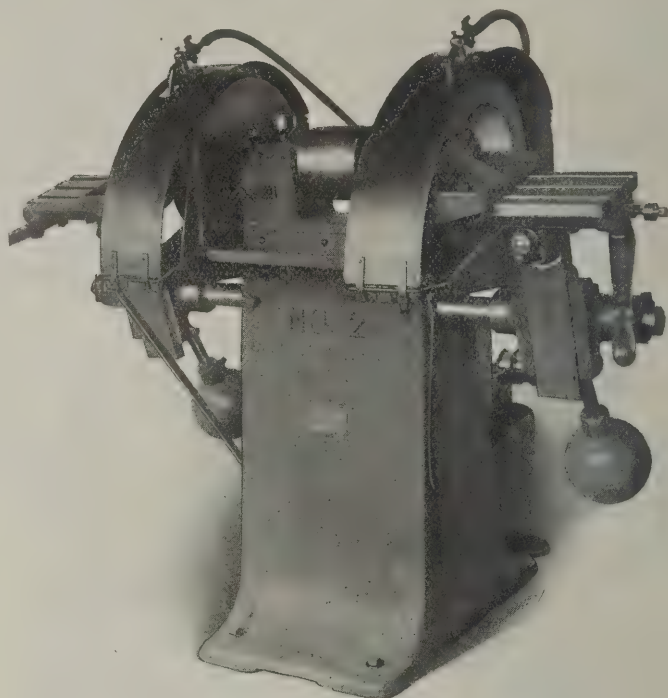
Ring Wheel Grinder with Water Shields and Angle Plates for holding Work
